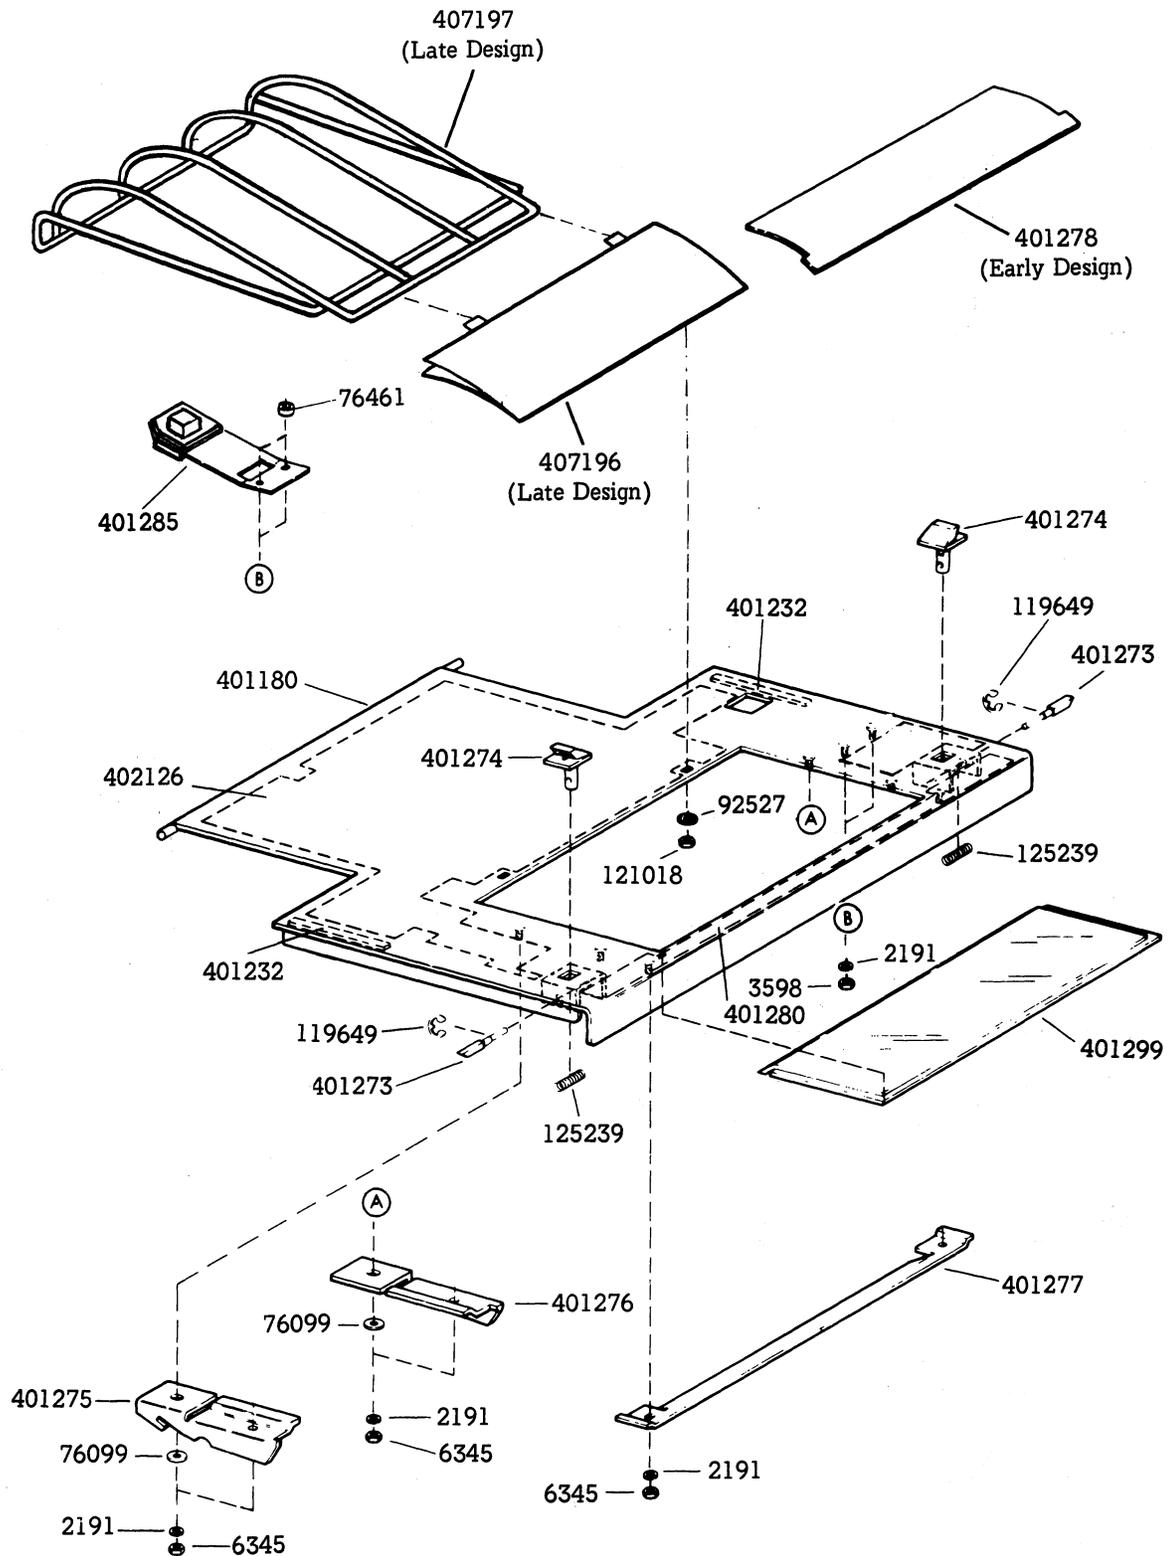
CAB251/AA Printer Under Monitor Cabinet Door
